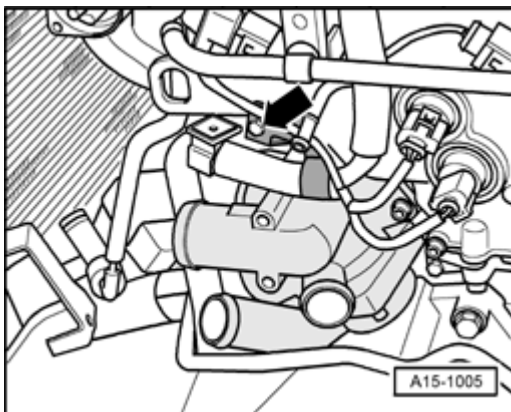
Removing Bolt On Bracket For Wiring Harness
